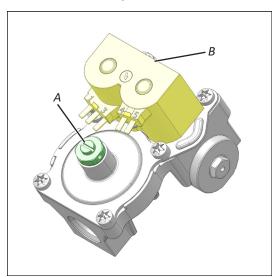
B - Style "B" - Gas Valve A. Vent Cap B. One Piece Coil
